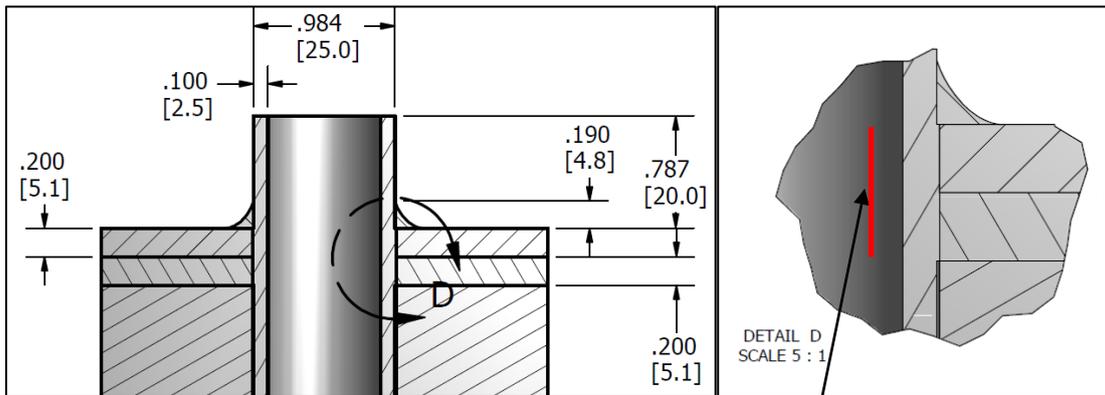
Typical Ø 25.0 mm x 2.5 mm Tube Sheet Arrangement
